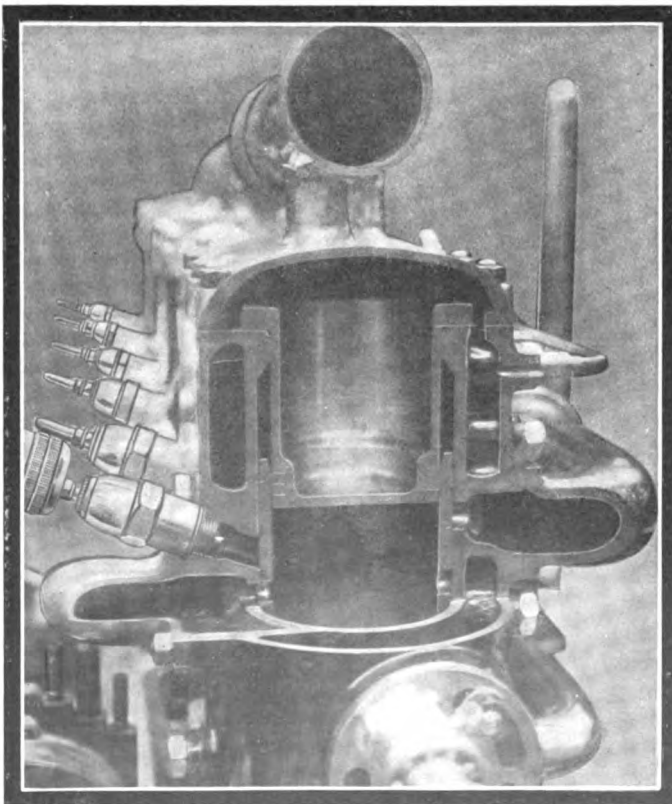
Section of the Rolland Pilain sleeve-valve motor
